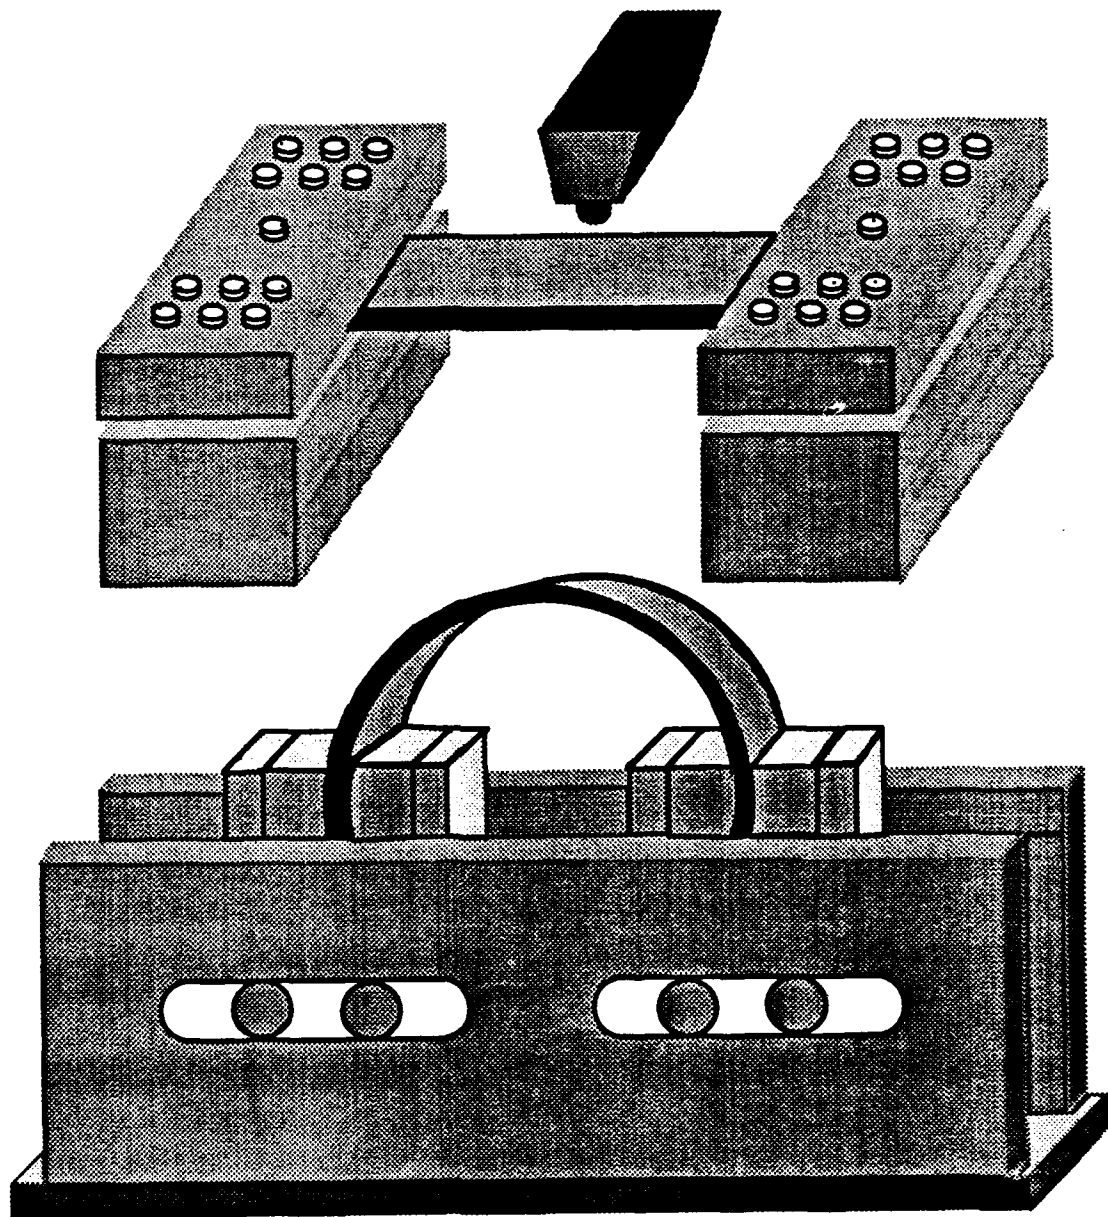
Schematics of the testing fixtures. (Above): The testing fixture for flat panels. (Below): The testing fixture for cylindrical panels.
